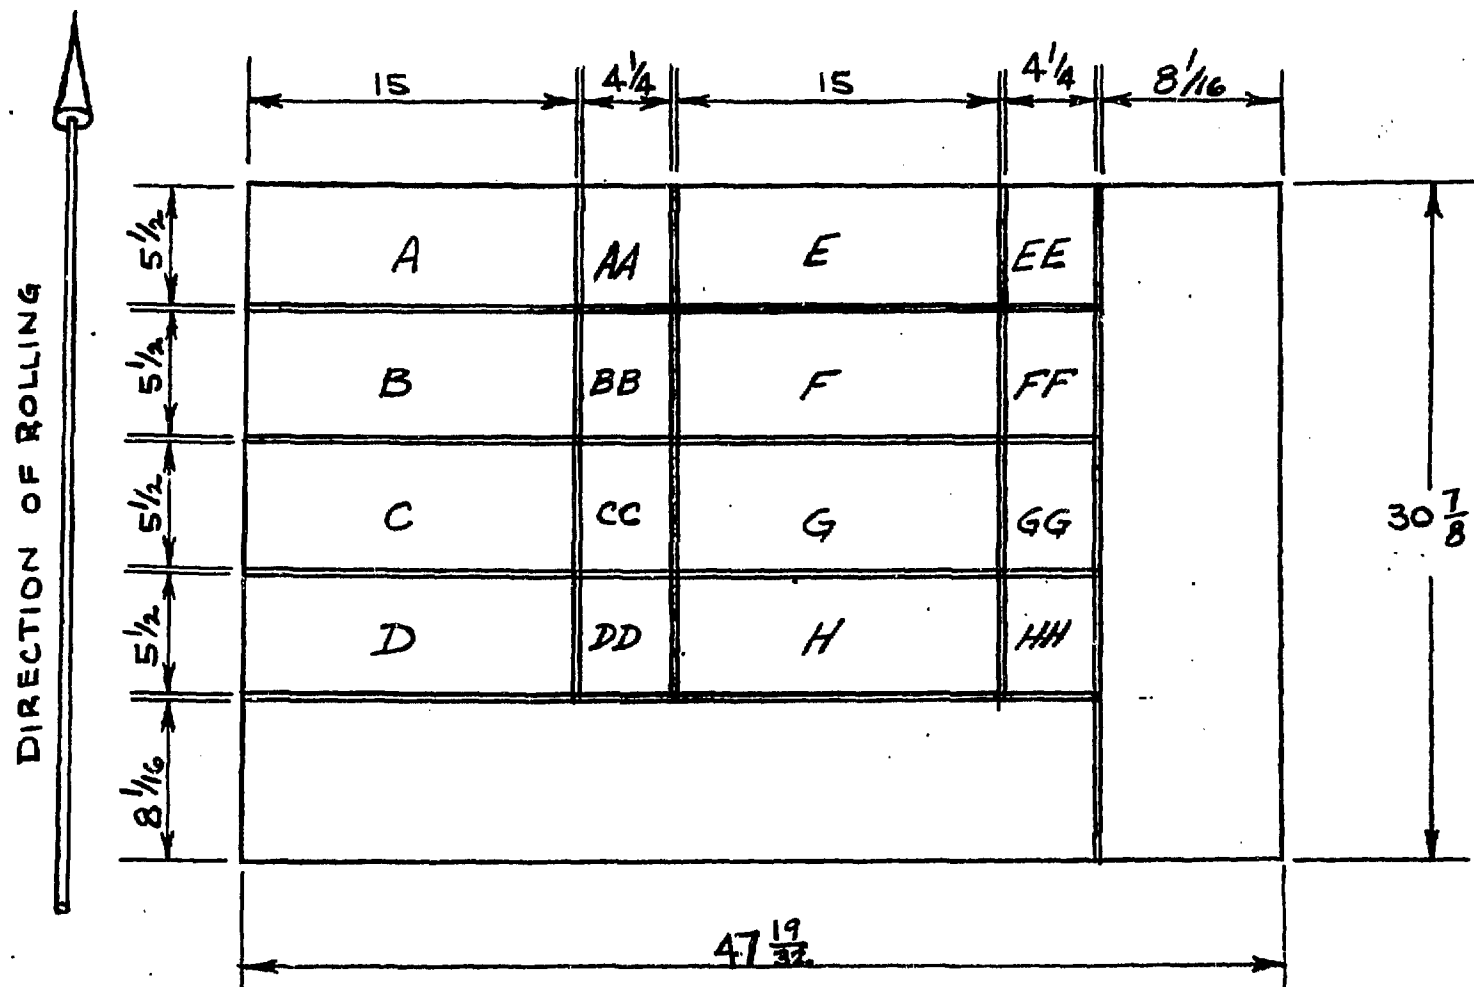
Sectioning layout for one-inch thick Inconel 718 plate : Ht 83C2EK.
